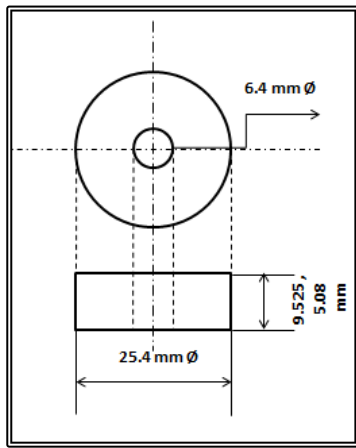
Schematic design for the dimensions of stainless steel specimens.
